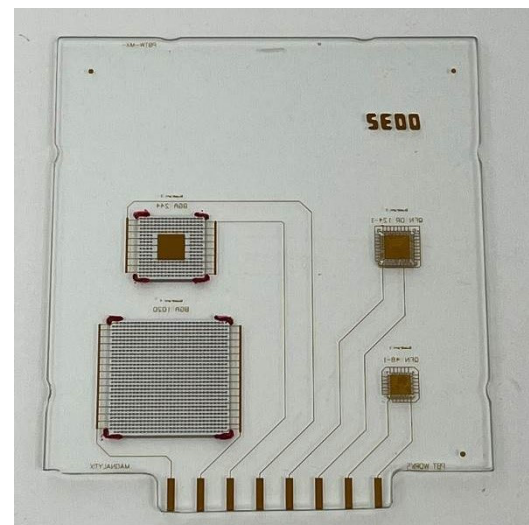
Glass Test Board for cleaning parameters optimization with QFN48, QFN DR124m, BGA244, and BGA 1020.
